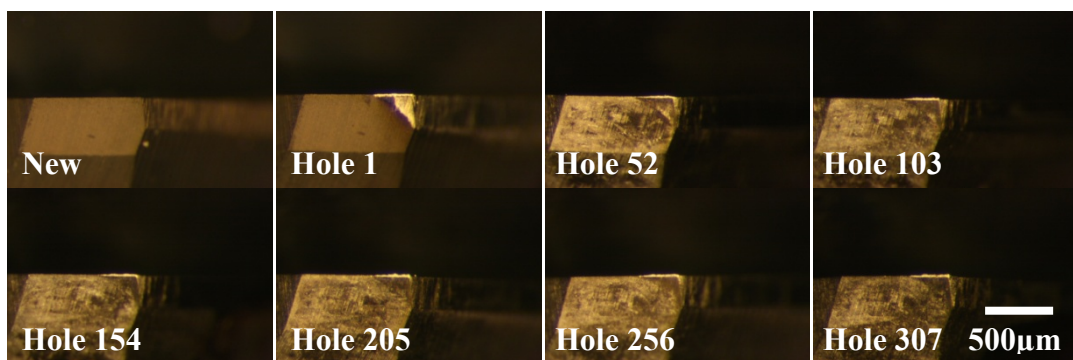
Tool wear micrographs of Graphit-iC™ reamer under 70bar through-hole cutting fluid, 32m/min cutting speed (Test 3)
